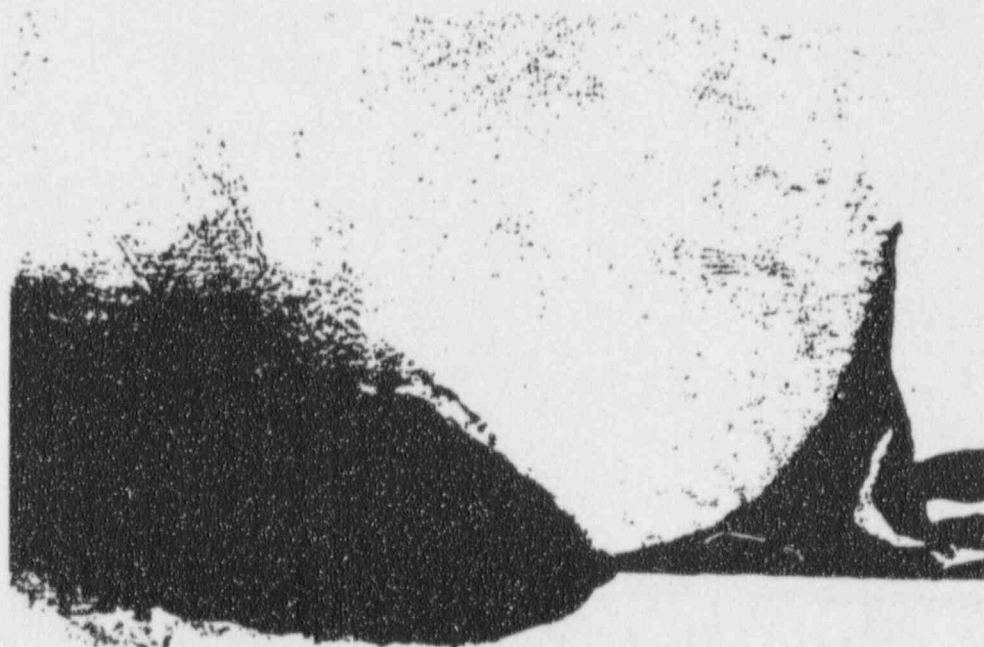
Corrosion at root of weld 2RN442-13. Lack of fusion also evident, but corrosion took different path than in Figure 11. Same preferential attack in weld metal. (32X) Oxalic acid. Mi-3329.
